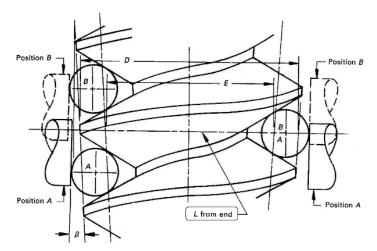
Two-Wire measurement of a taper thread plug gauge.
